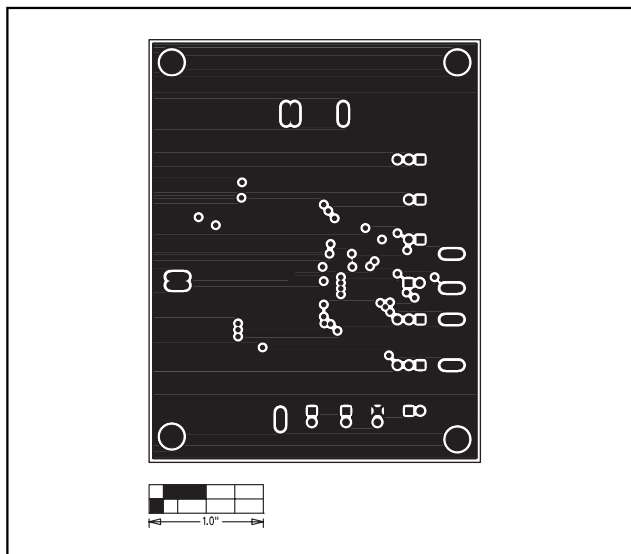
MAX1845 EV Kit PC Board Layout—Internal GND Plane (Layer 3)
